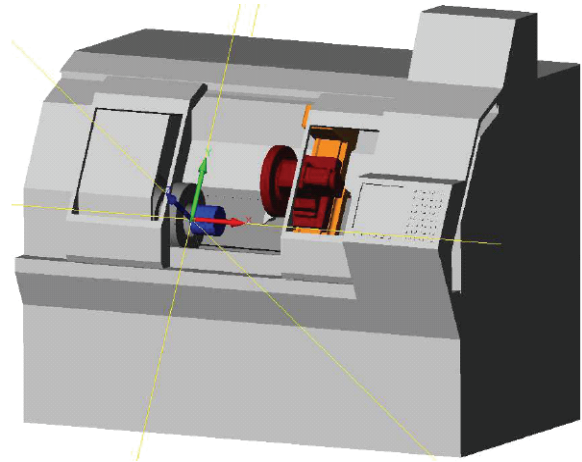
Machine tool mock-up. 2 NC axes lathe.
